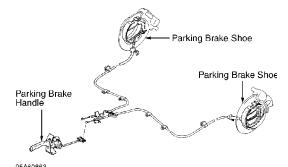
Identifying Parking Brake Components (Rear Disc Brake Equipped) Courtesy of Subaru of America, Inc.
